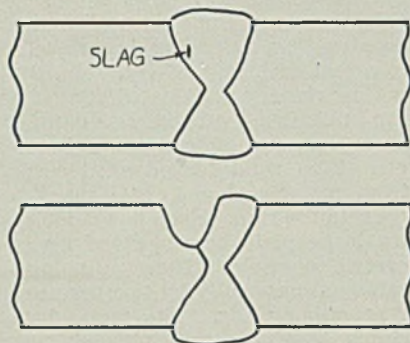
Slag inclusion shown at top is removed below, leaving sloping sides for the repair weld
